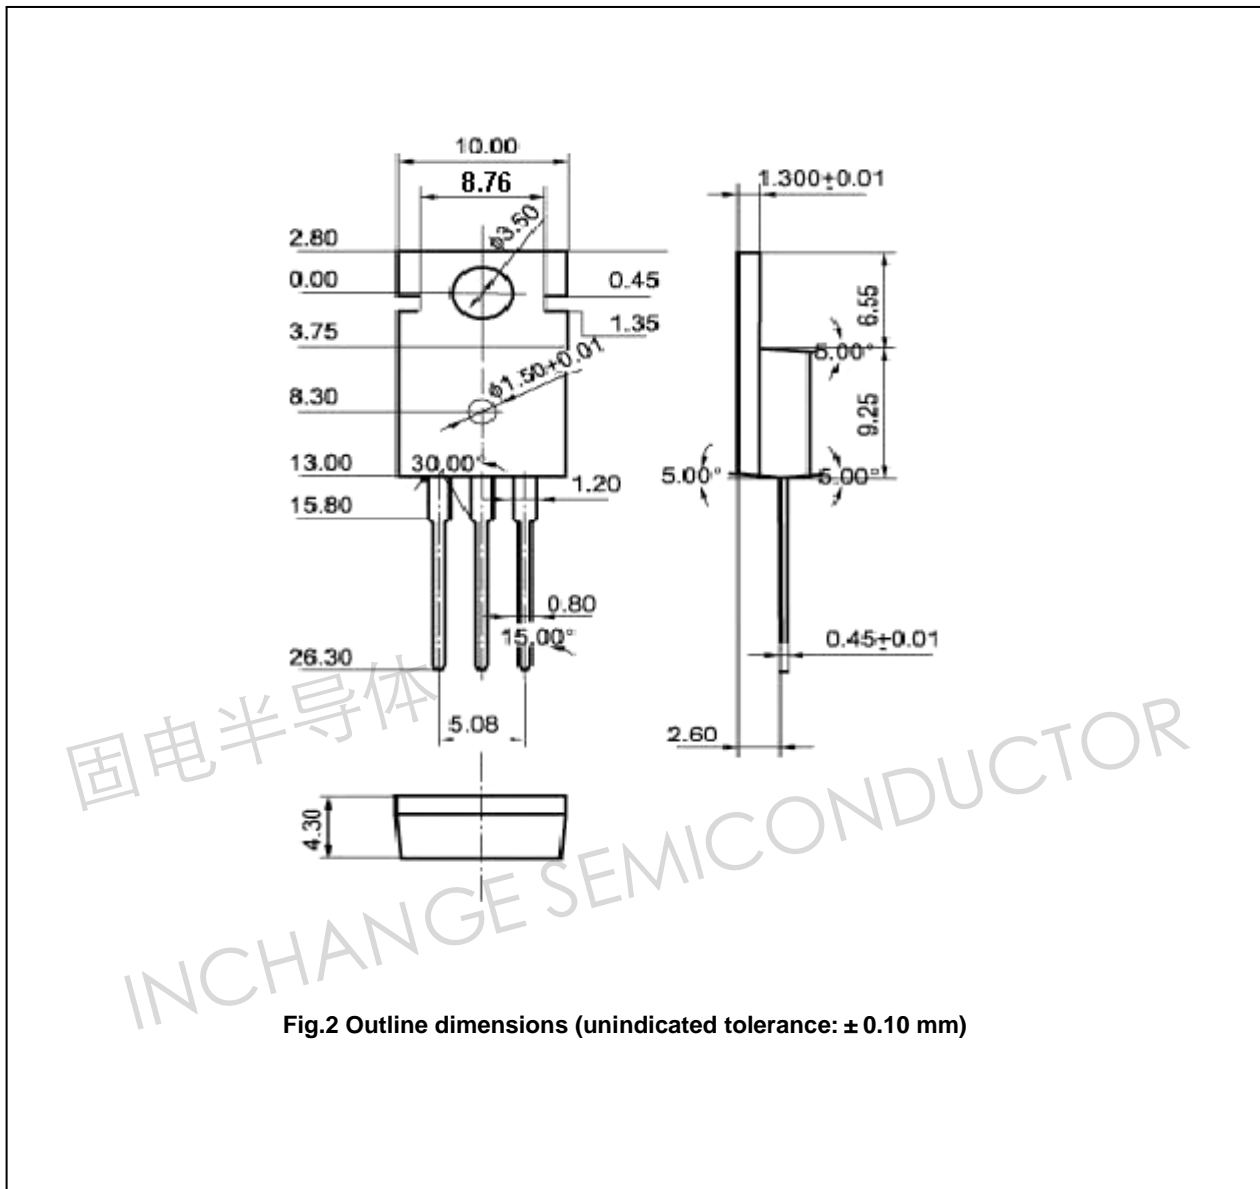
Outline dimensions (unindicated tolerance: ± 0.10 mm)
